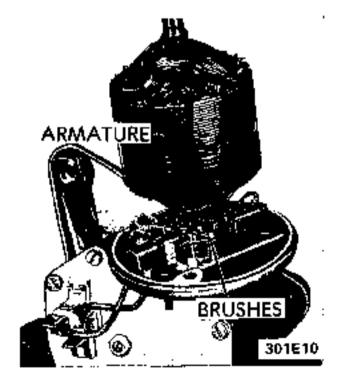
E-I 0 Transmission and Armature Removed from Motor Housing
